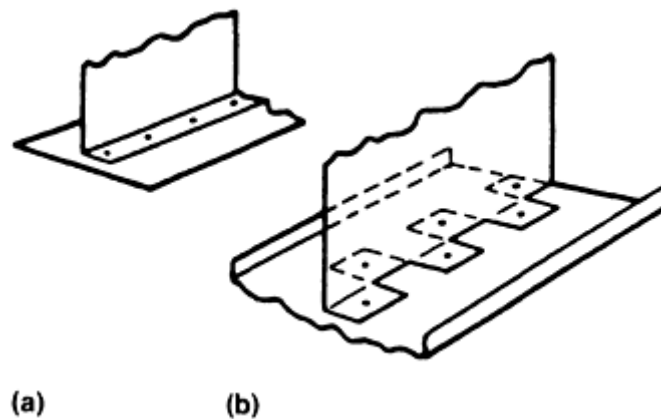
PLACEMENT OF WELDS TO JOIN TWO SHEETS OF METAL IN A T-JOINT. (A) CONFIGURATION NOT RECOMMENDED DUE TO UNBALANCED SHRINKAGE FORCES. (B) PREFERRED SETUP THAT RESULTS IN BALANCED FORCES AND MINIMUM DISTORTION
